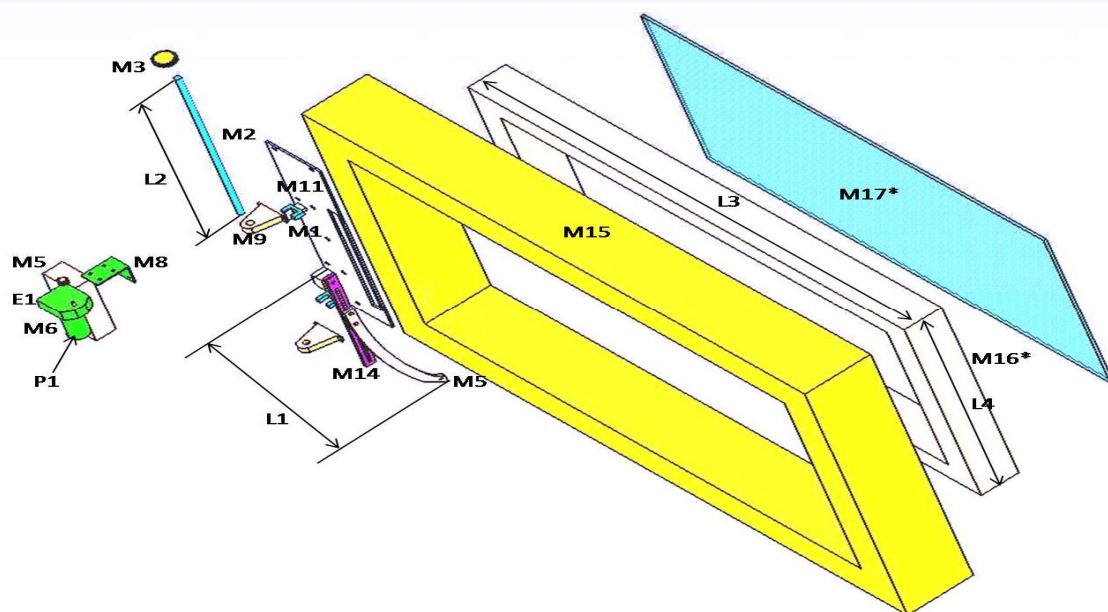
Exploded View with Parts Referenced to Bill of Materials
